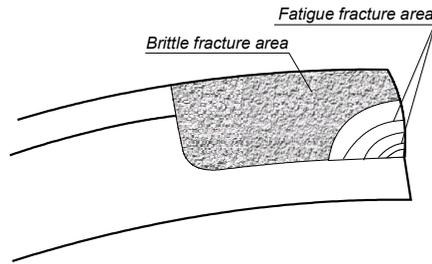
Scheme of a fatigue fracture area with beach marks and brittle fracture area
